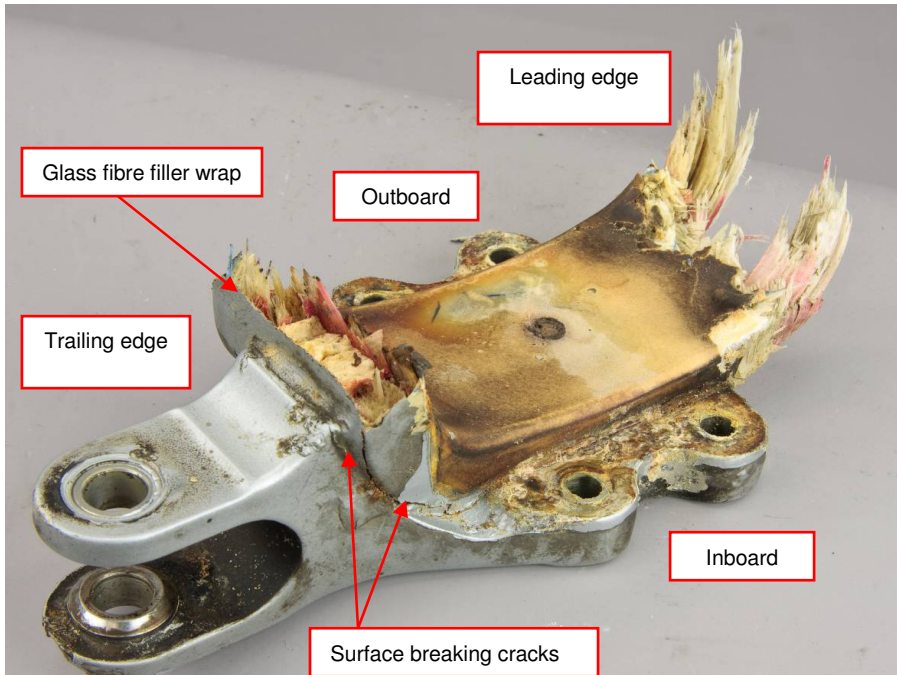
Photograph showing the fractured root area of the White blade after removal of the elastomeric bearing
